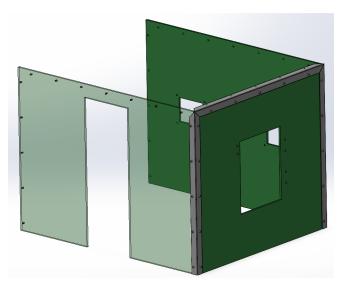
Left and right acrylic installed onto the chamber assembly.
